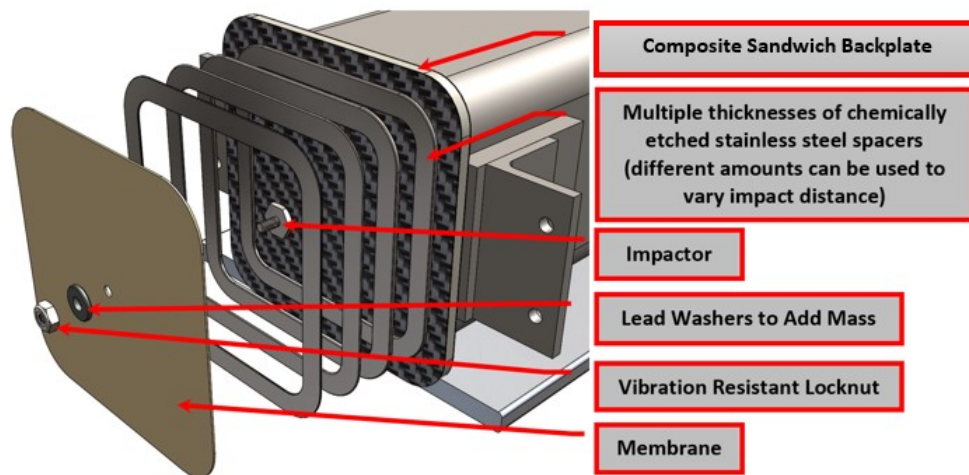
Exploded view of the MIVIS unit cell test article assembly with part of the transmission loss tube. Picture Courtesy: C2Si.
